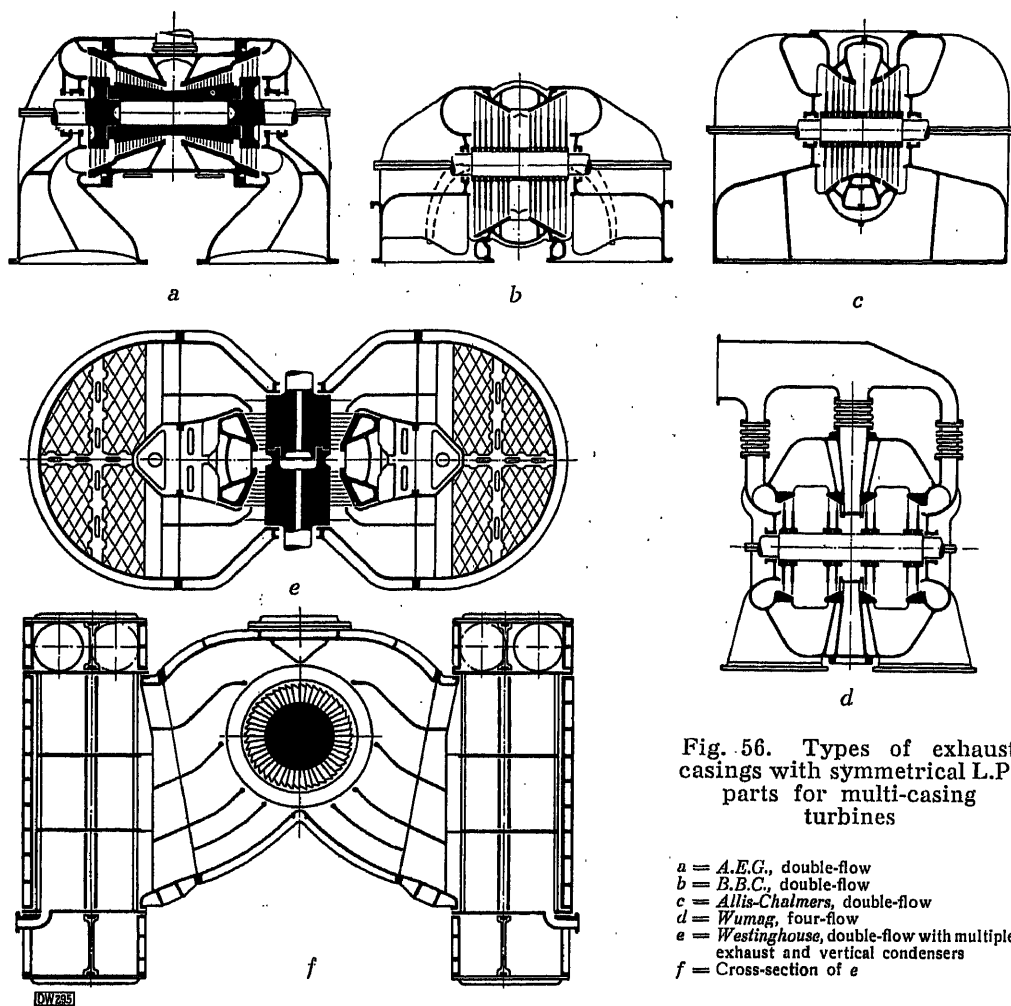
Types of exhaust casings with symmetrical L.P. parts for multi-casing turbines
